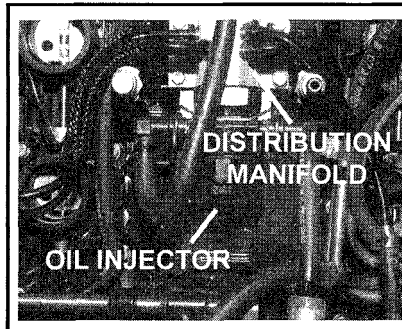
The oil pump components (injector, manifold and pump) are normally removed as an assembly
